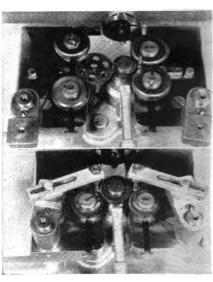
(Above)—Close view of Burnishing Gears and Operating Slides—two gears of different diameters being burnished at same setting. Fig. 3.—(Below)—Burnishing Helical Gears-Note adjustable stops to prevent endwise motion of gears when burnishing pressure is applied.
